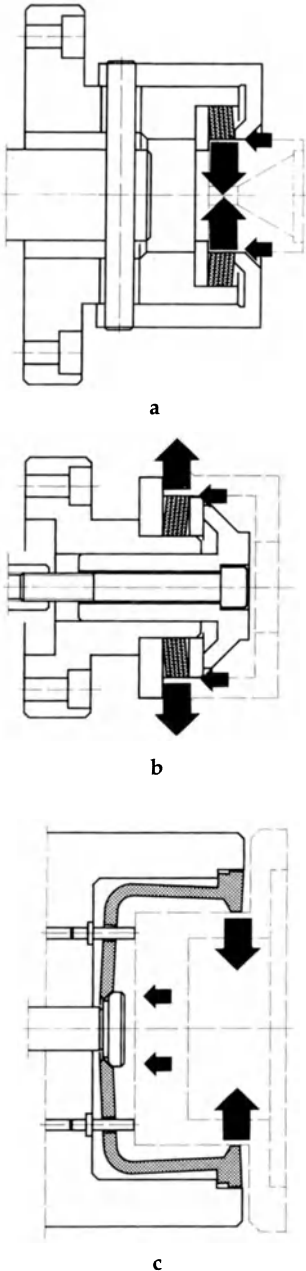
Utilising the principle of a hardened spring steel conical clamping ring for workholding applications. a Disc pack chuck for outer clamping. b Disc pack mandrel for inner clamping. c Basket chuck for outer clamping. [Courtesy of Ringspann (UK) Ltd.]
